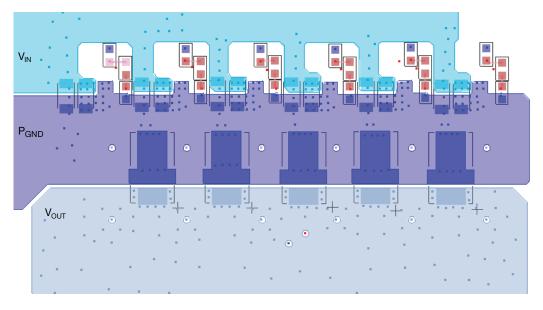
Multi-Phase VRPower Layout Bottom View
